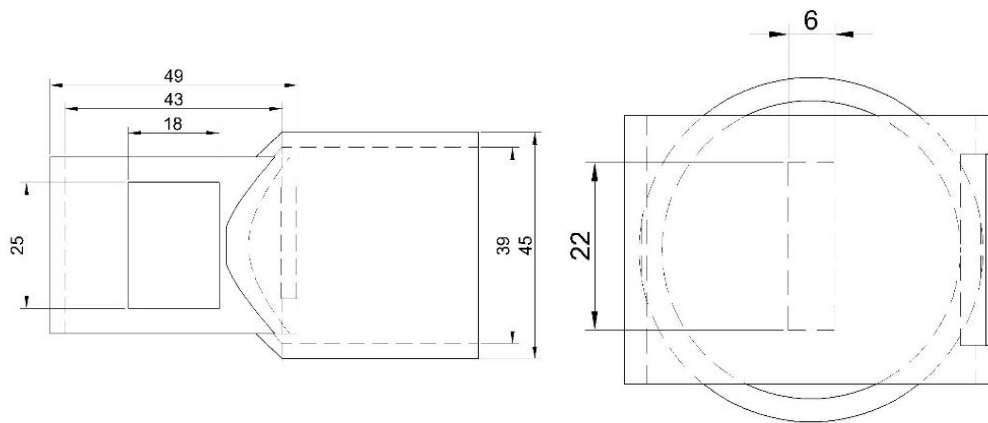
Detailed dimensions of the 3D printed holder for photomultipliers use with the lab-scale spray dryer. Left: bottom view Right: right-side view.
